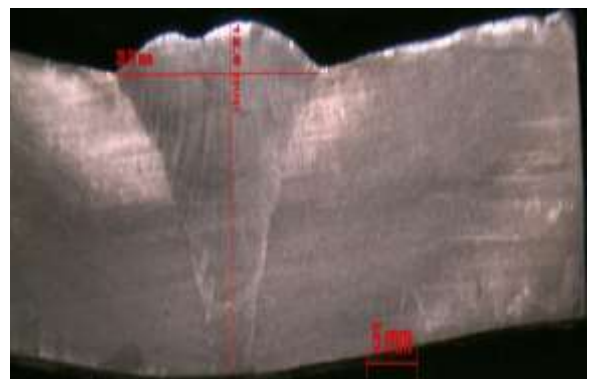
Macroprofile of stainless steel welded at heat input of 1250 J/mm.
